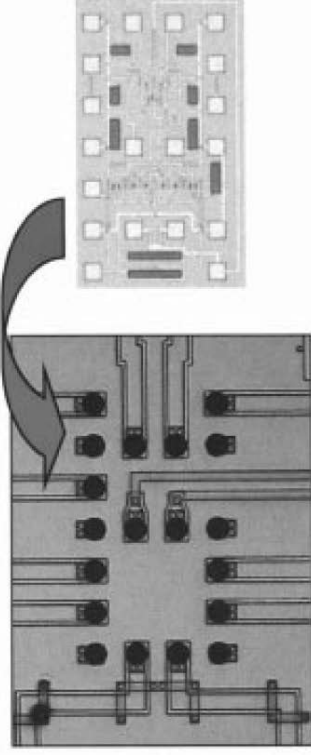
Principle of flip-chip mounting. Left: detail of the MCM-D module with bumped pads, Right: clip, which is to be mounted upside-down on this module.
